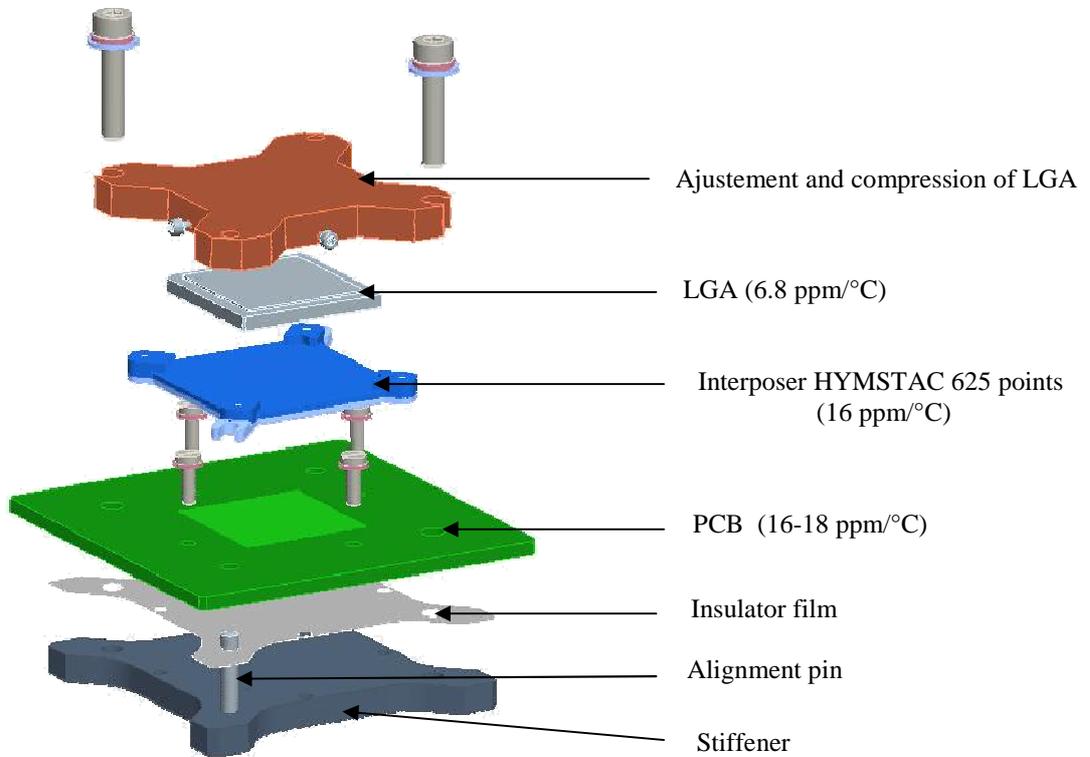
Exploded view of the interconnection including LGA, Hymstac and PCB.
